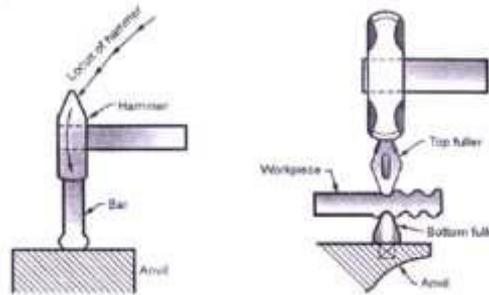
(a): Upsetting a bar Fig. 17(b): Drawing out
